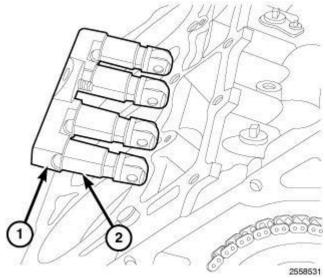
Rear MDS Lifter Assembly Courtesy of CHRYSLER LLC
